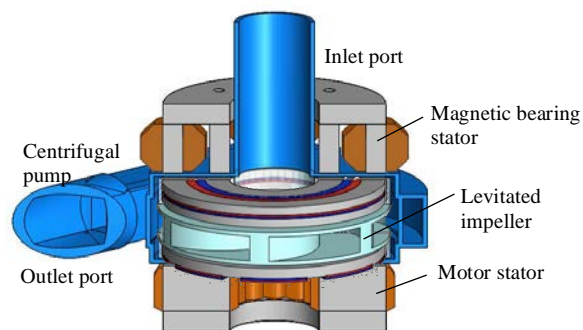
Cross sectional view of maglev blood pump with axial suspension system. A centrifugal pump is set between magnetic bearing and axial motor stator.
